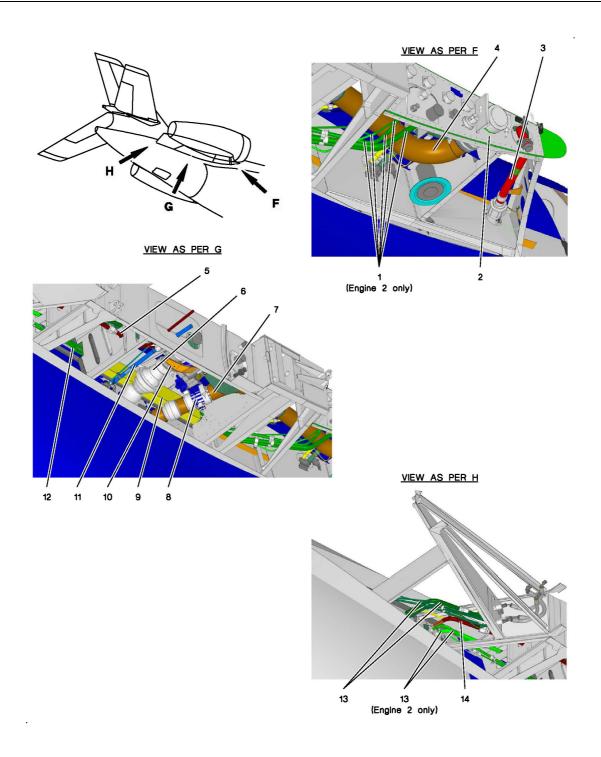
INTERNAL INSPECTION OF ENGINE PYLONS
